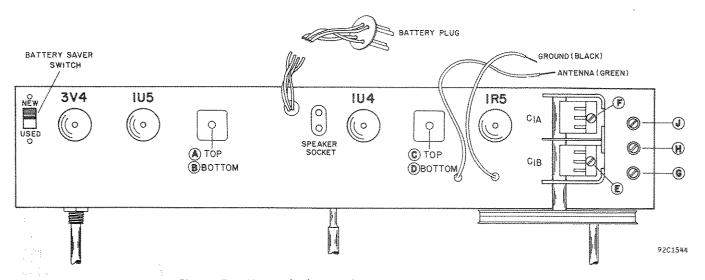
Top View of Chassis Showing Location of Alignment Adjustments and Tubes
